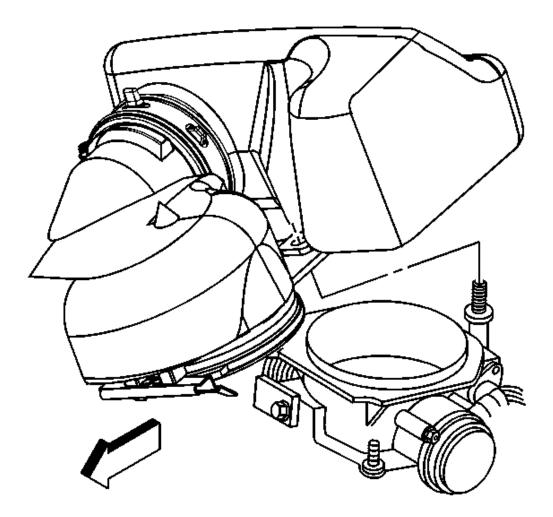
View Of Air Cleaner Outlet Duct Courtesy of GENERAL MOTORS CORP.
